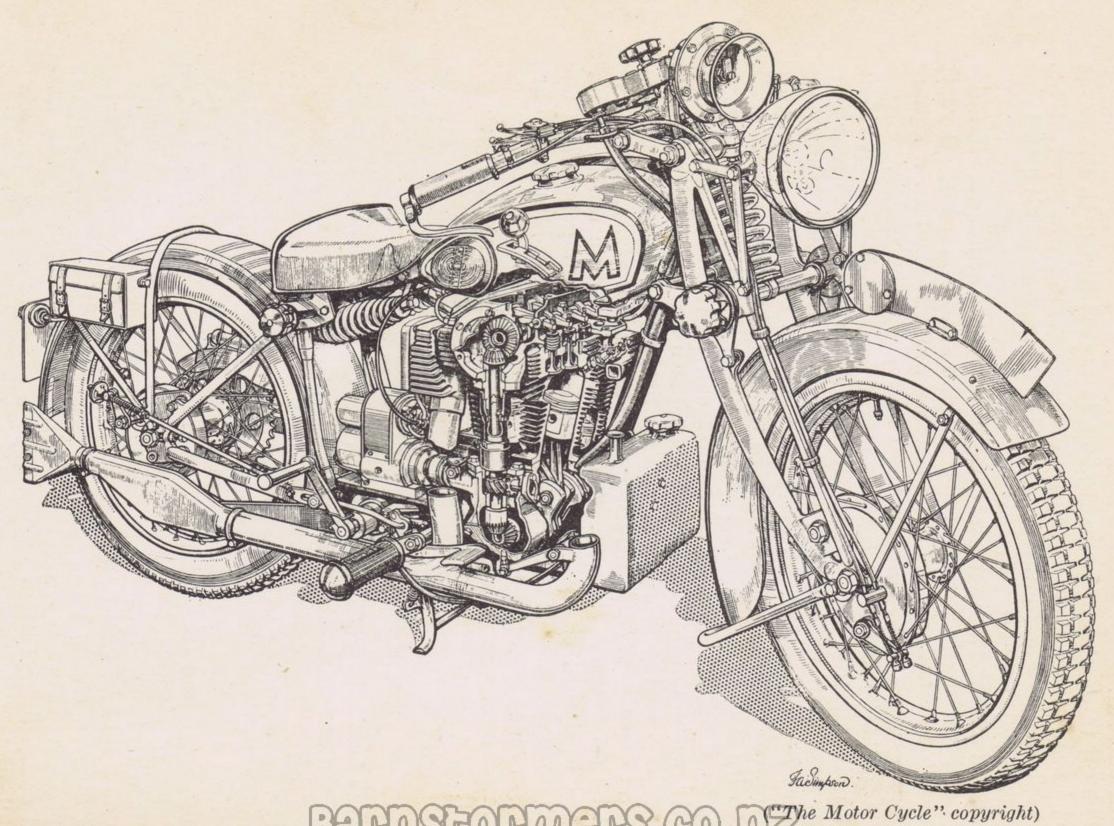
Partly Sectioned View of the 593 c.c. O.H.C. Narrow Angle Vee-four Spring Frame Matchless "Silver Hawk"
